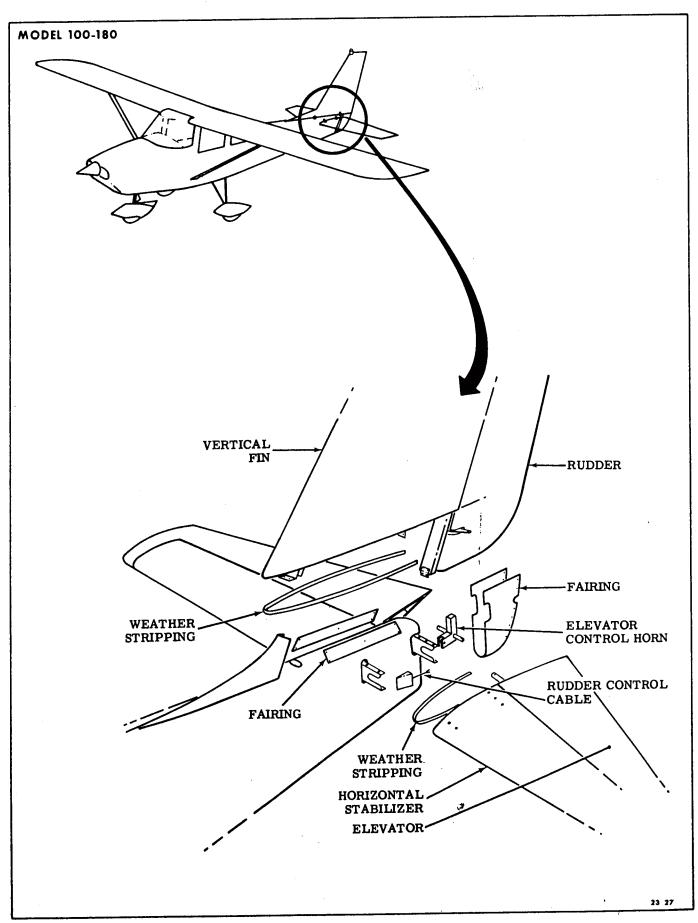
Vertical and Horizontal Stabilizer Installation (Sheet 2 of 2)
